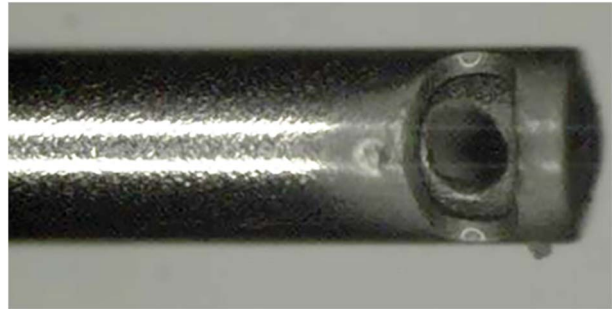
Photograph of a modified probe. The hole made in the guillotine blade is clearly visible. This probe was modified using electrochemical micromachining.
